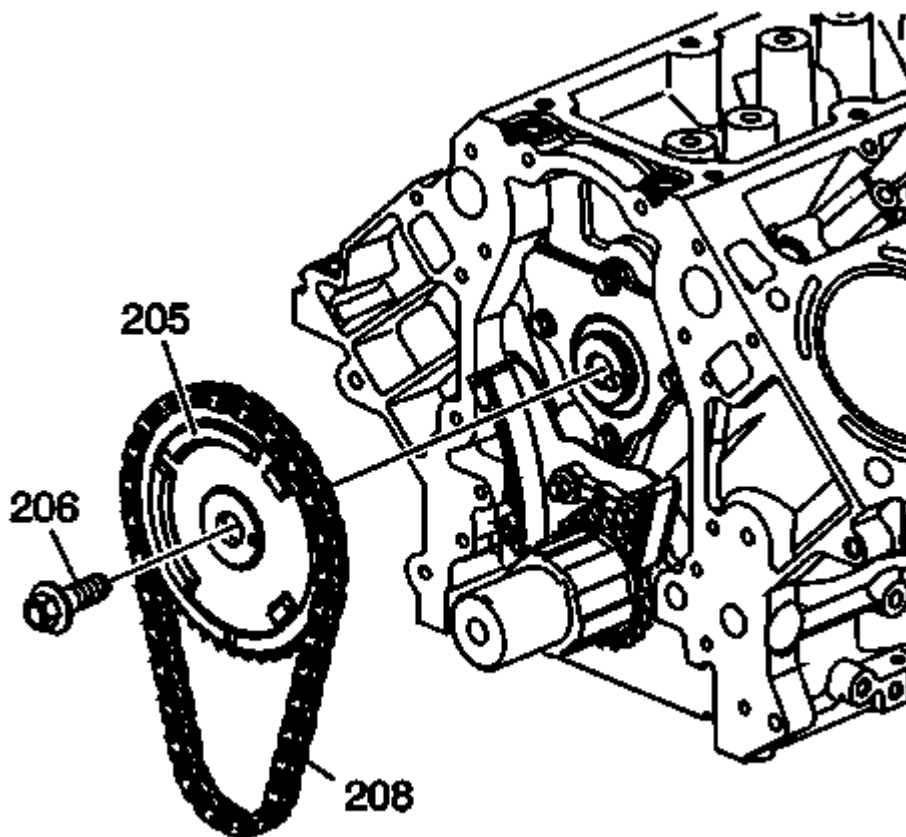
View Of Camshaft Sprocket, Timing Chain & Sprocket Bolt
